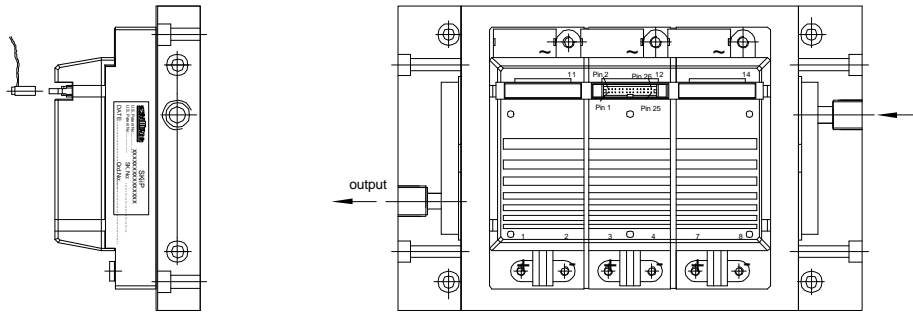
SKiiPPACK 3 standard assembly with water-cooled base plate
